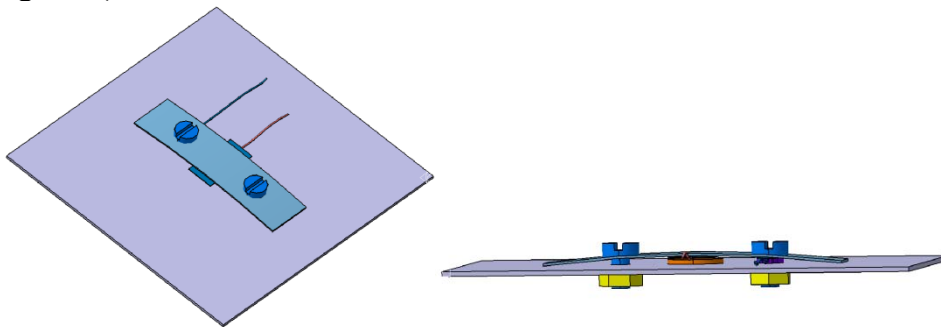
A60 B59060A0040 thermistor attachment system to the aluminium plate
